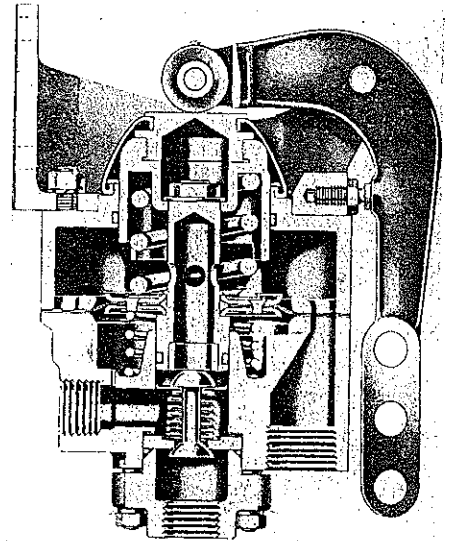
Sectional view of Type D-1 Lever-Operated Brake Valve
